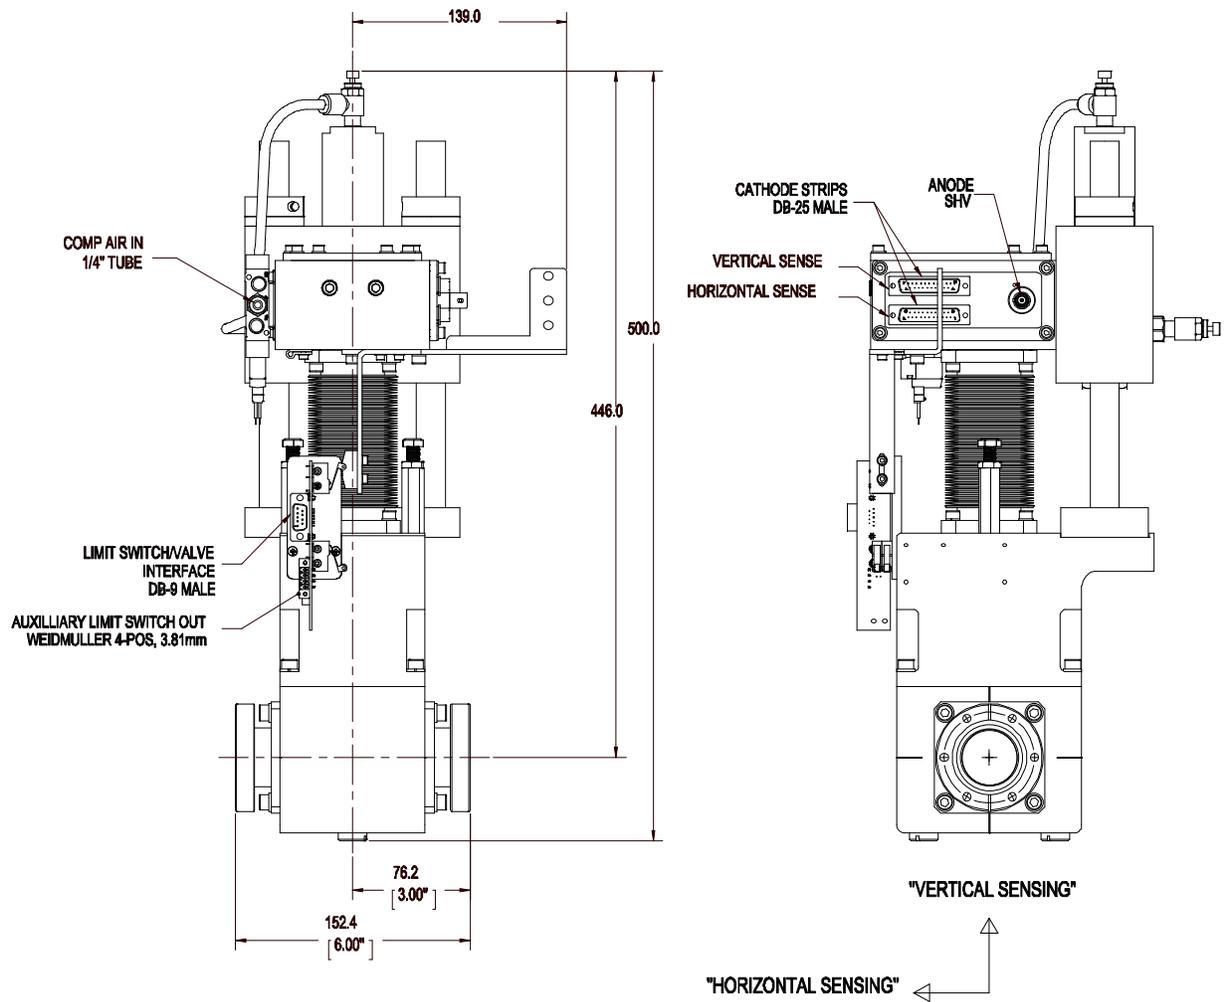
BPM layout continued; sensor out of beam position (bellows extended). Dimensions mm.
